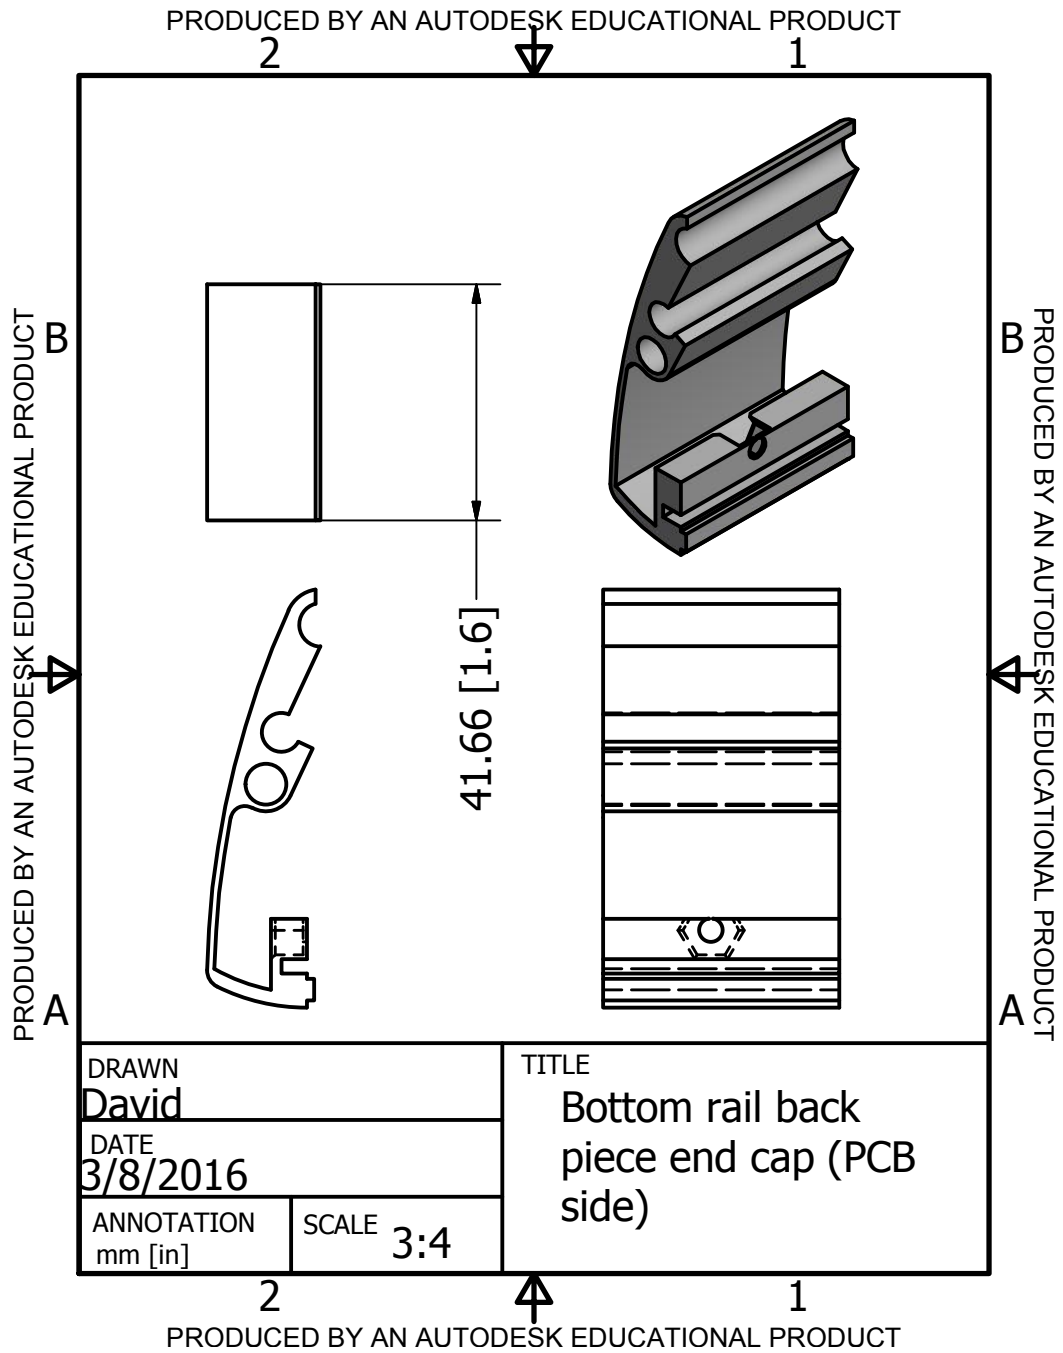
Mechanical drawing for the back piece end cap for the side of the bottom rail that does accept wall adapter power.
